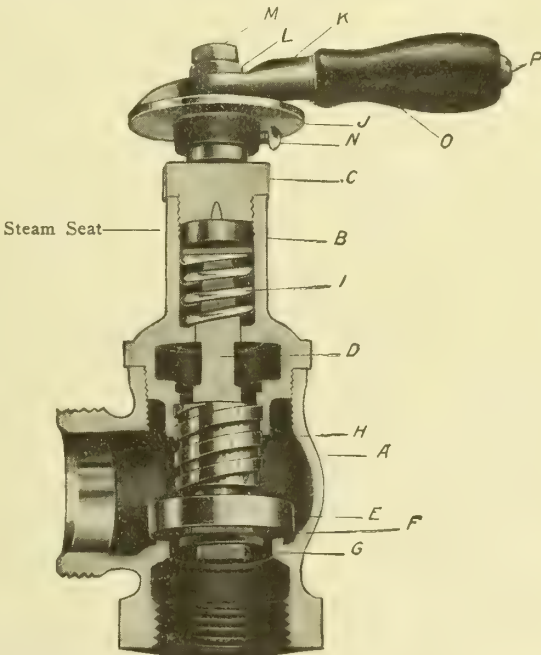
SECTIONAL VIEW OF CONSTRUCTIVE PARTS
